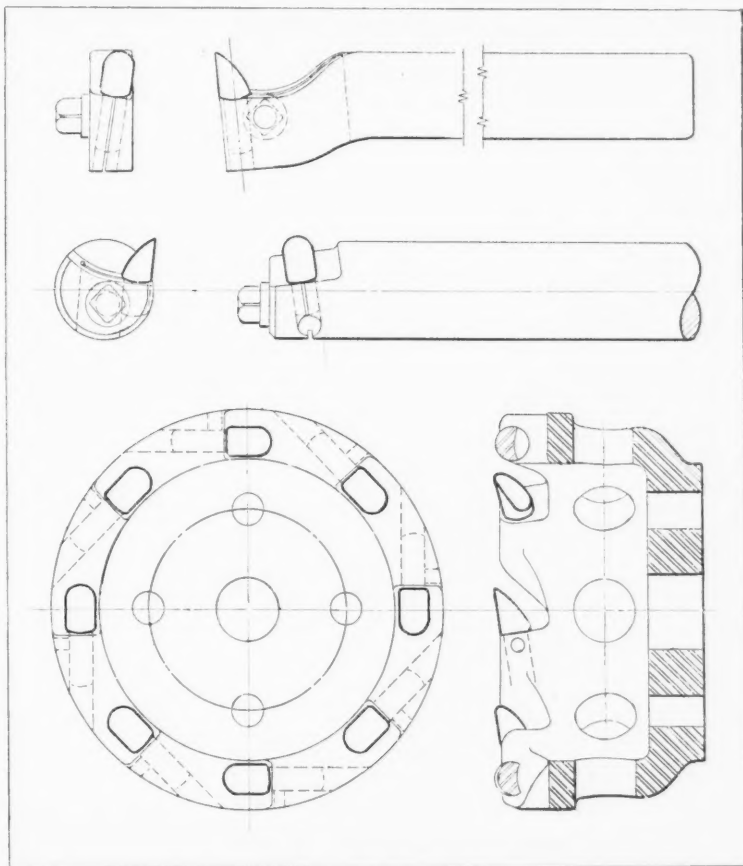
Tool Bits Made from Round Stock, Ground for Machining Aluminum, as Applied to Tool-holders and Milling Cutters
